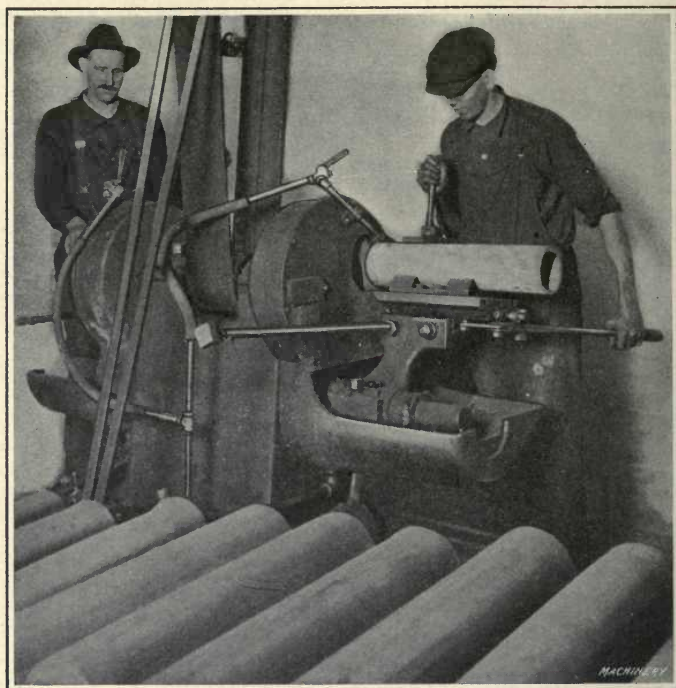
Grinding Base End of French 120-millimeter High-explosive Shell Forgings in a Gardner Disk Grinder
